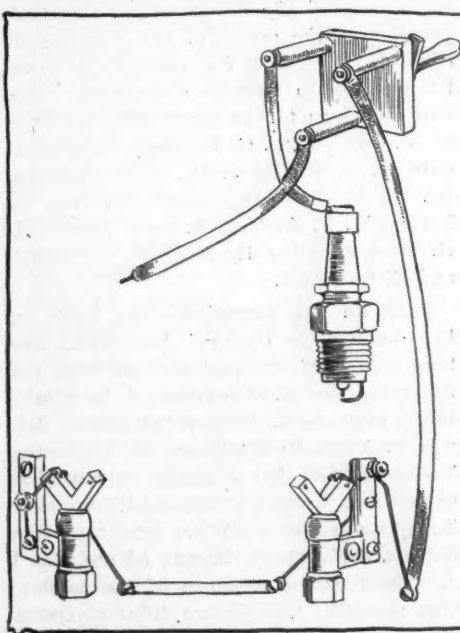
ELECTRO-LITER SYSTEM FOR ACETYLENE HEADLIGHTS
